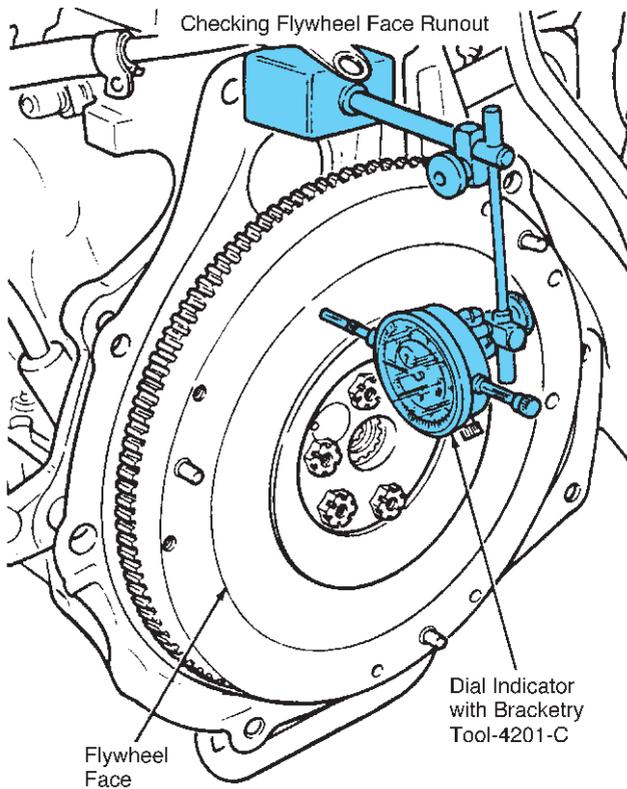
This dial indicator is set up to measure flywheel face or axial runout. (Courtesy of Ford Motor Company)
